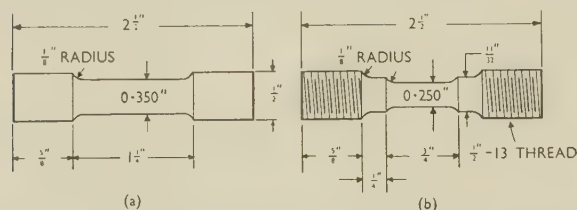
Dimensions of the (a) Torsion and (b) Tension Test Specimen.
